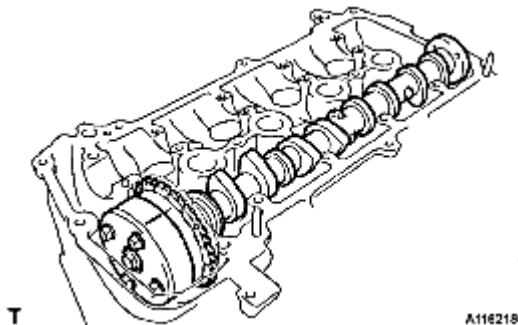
Identifying Camshaft And Camshaft Timing Gear Assembly
